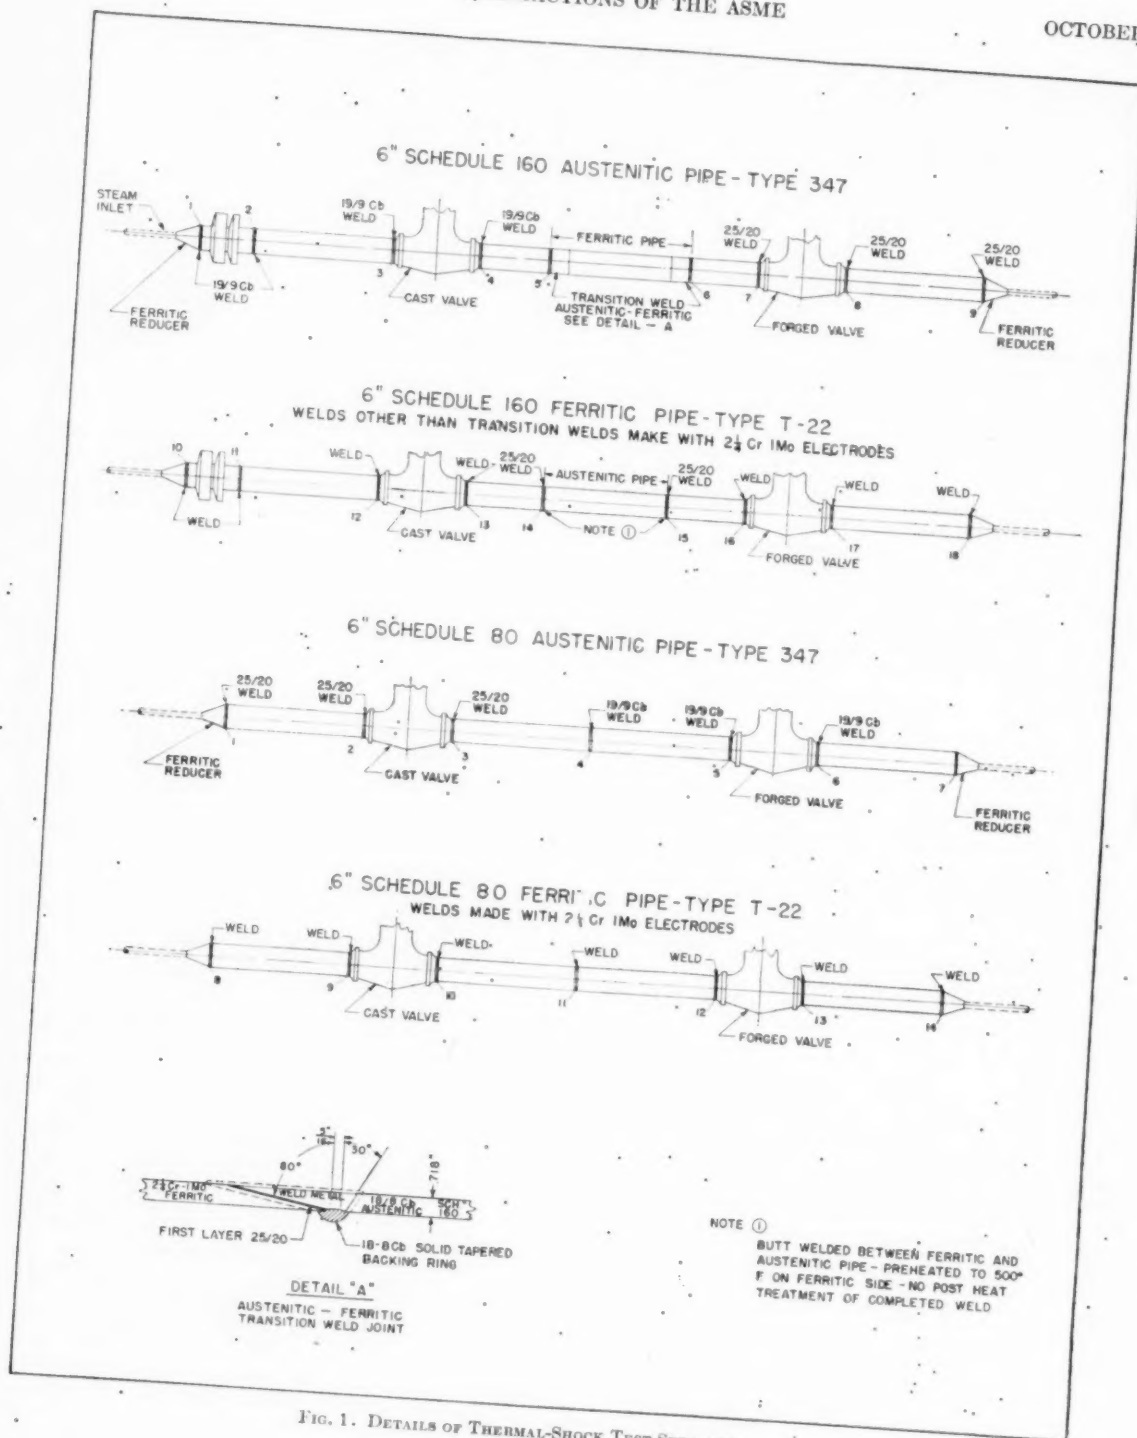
DETAILS OF THERMAL-SHOCK TEST SPECIMEN
